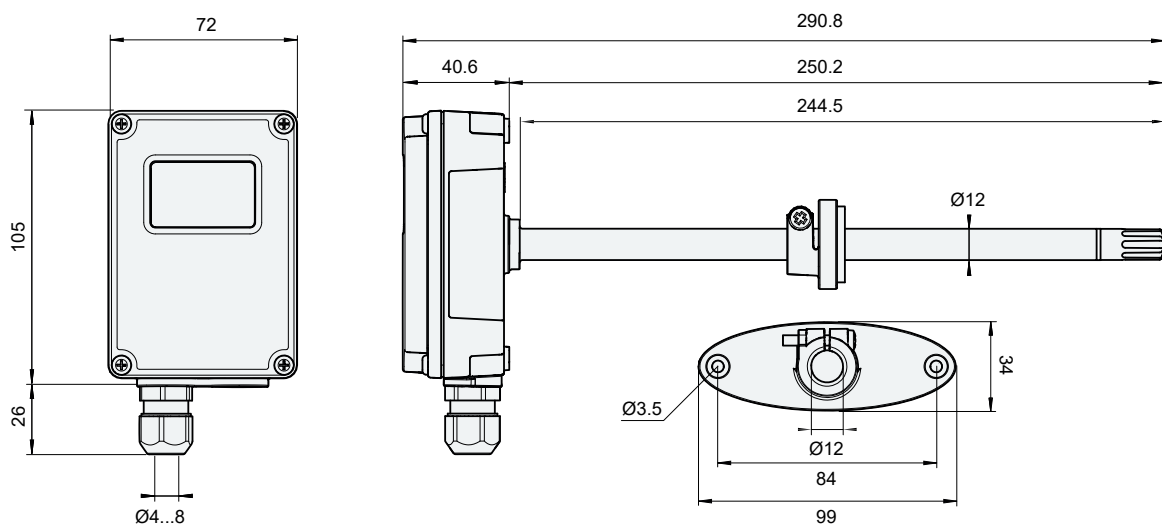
Duct model dimensions (HMD82/83 and TMD82/83)
